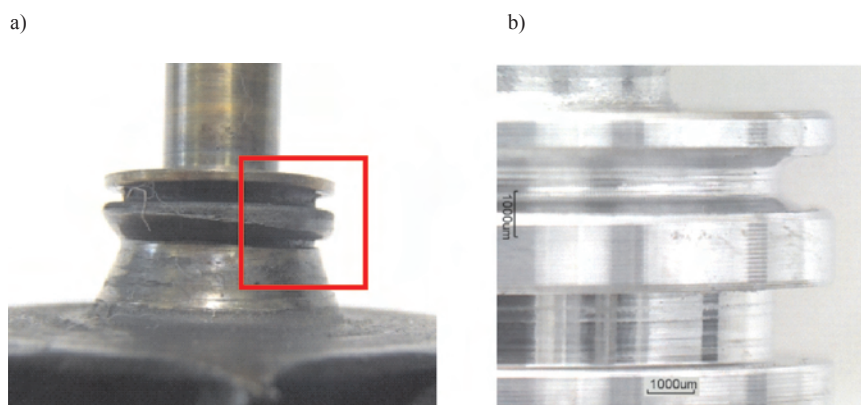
The ring part: a) damaged element – scale 1:1, b) new element – scale 4:1
